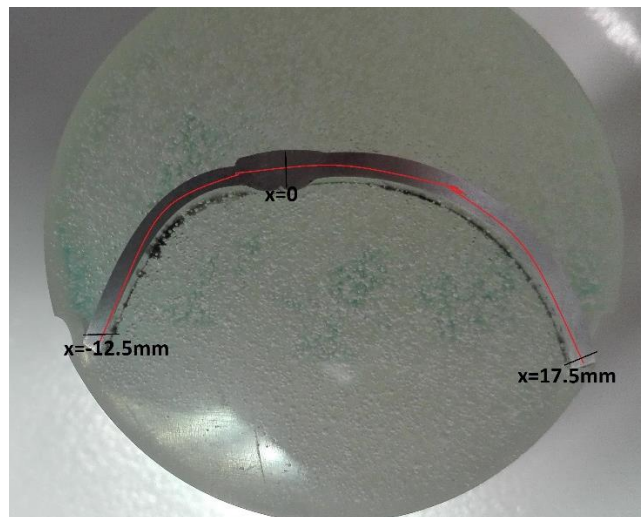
Macrograph of the MIG welding between 7005-T1 and 7005-T6 samples, showing the direction of microhardness measurements. The area left of the weld consist of 7005-T1 material and the area at the right consist of 7005-T6 material.
